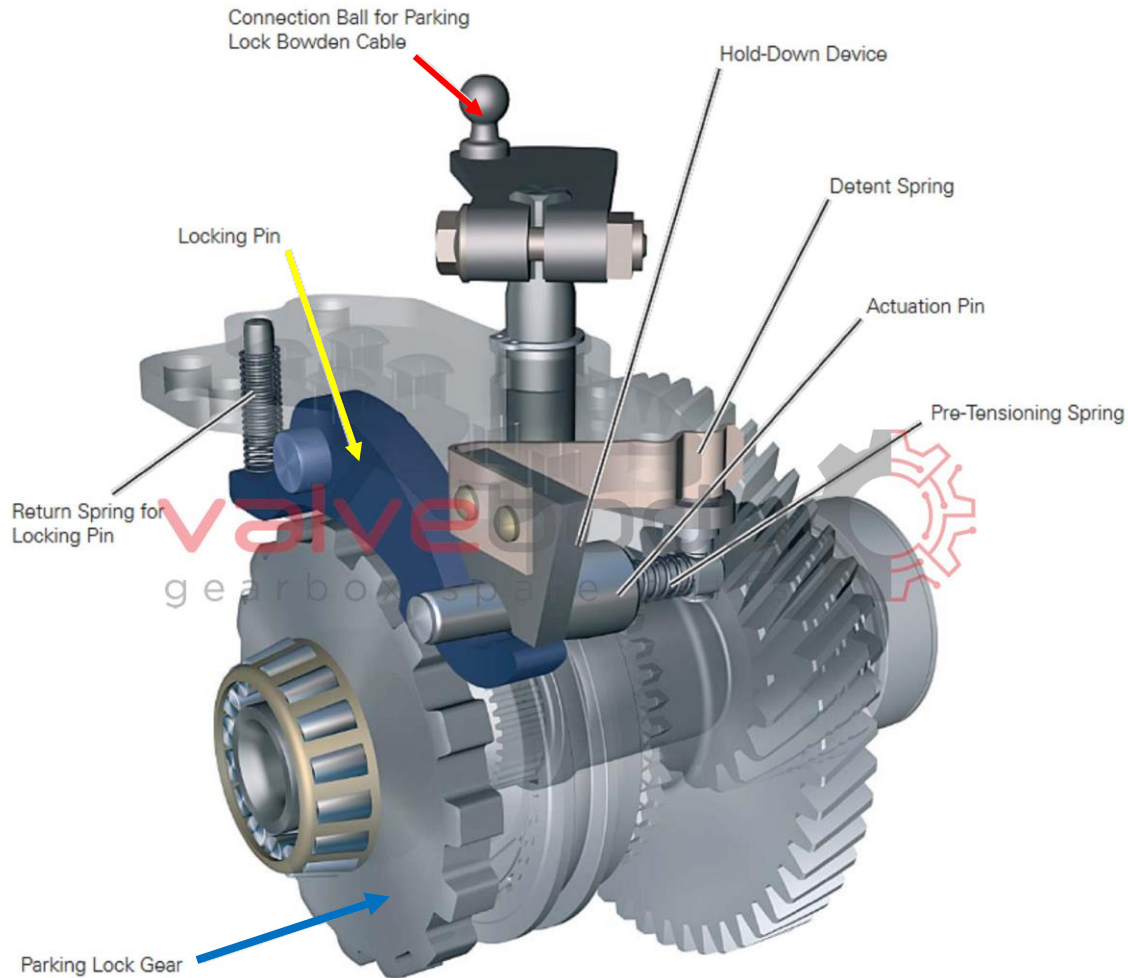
shows an illustration of the gearbox internals of the Insured Vehicle and the connection ball (red arrow) is where the gear shifting cable connector and its rubber grommet is attached onto (red arrow), when the P gear (Parking gear) is engaged, it controls the shifting cable and move the locking pin/parking pawl (yellow arrow) into the grooves of the parking lock gear (blue arrow) to stop the Insured Vehicle from rolling forward or backwards.
